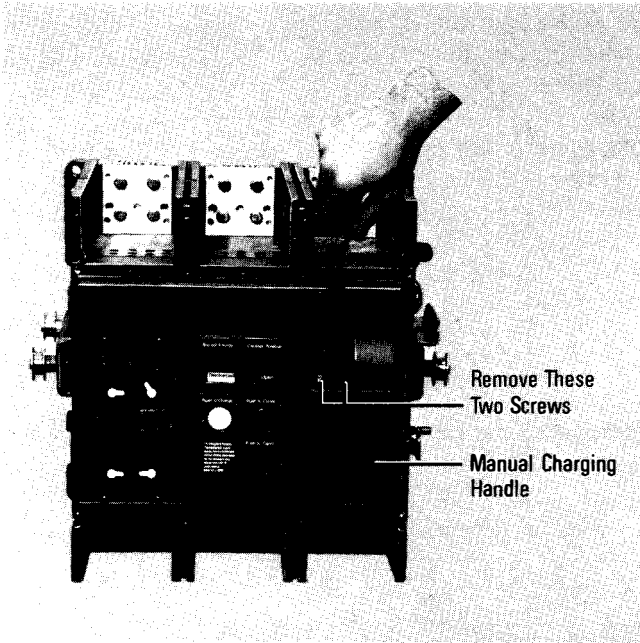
Removing Charging Handle Screws From an SPB Breaker.
